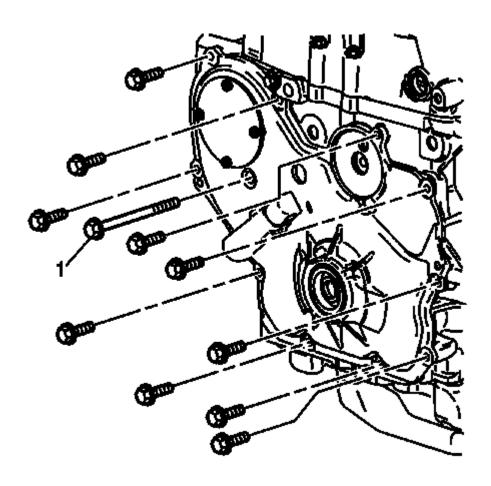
Engine Front Cover Bolts And Long Water Pump Bolt Courtesy of GENERAL MOTORS COMPANY
